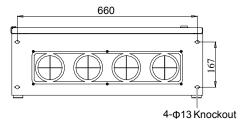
Installation hole dimensions for floor mounting of BCB box of 300/400kVA UPS (unit: mm)
